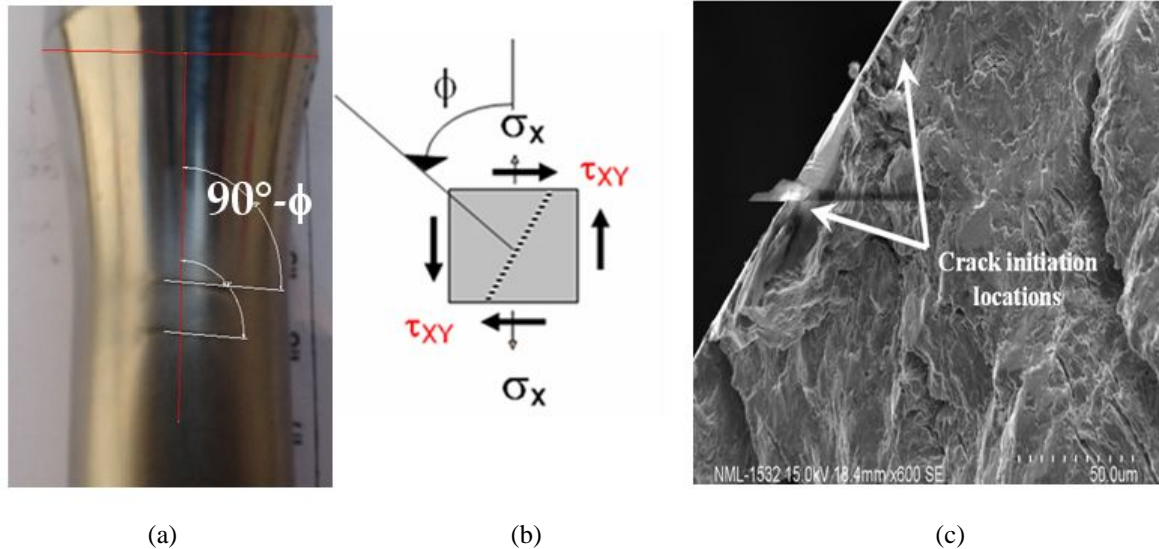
(a) Measurement of crack angle (ϕ) in a typical cracked specimen, (b) schematic of material plane orientation and (c) SEM image of a typical cut-open test specimen indicating the crack initiation spots at outer surface
